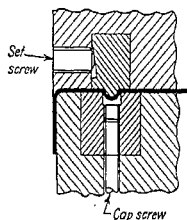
Draw bead and mating groove machined from bar stock and recessed into die members.
